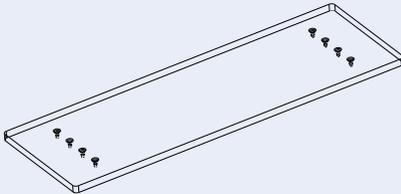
Microscopy slide through-hole platform – version with eight fluidic interfaces
